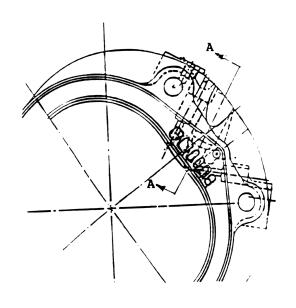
shows the dual spark plug installation for the 40 cu.in., 70 Series rotor housing.
